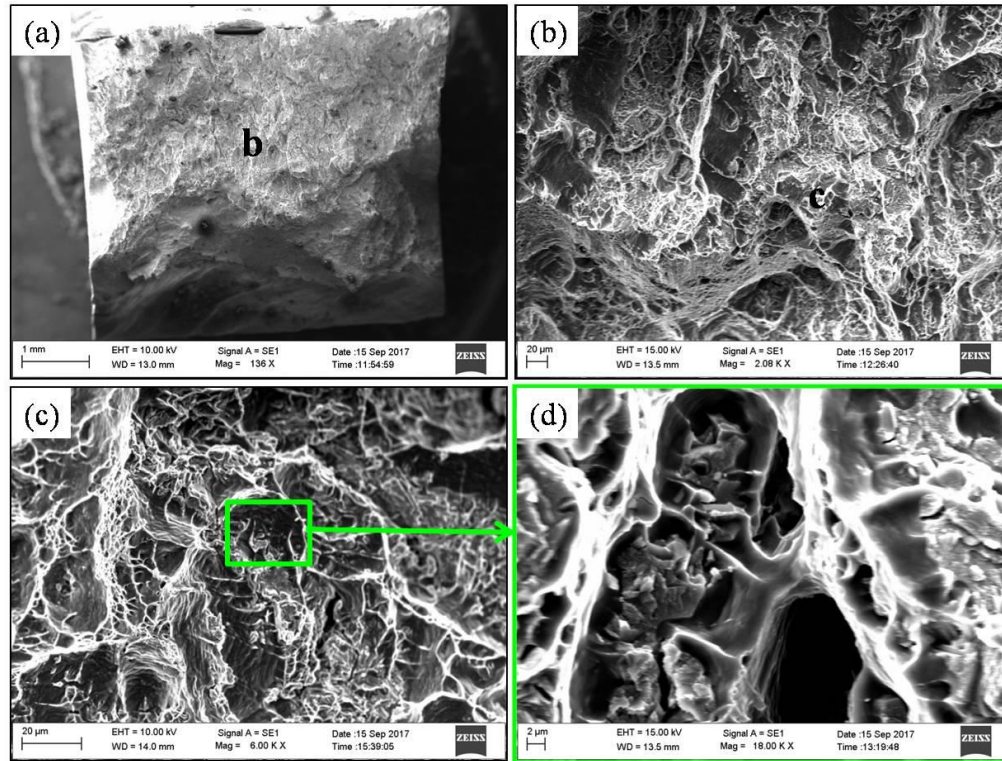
SEM images of fractured surface of tensile test specimen of EB weld with lowest breaking load (a) whole fracture surface at low magnification (b), (c) and (d) high magnification fractographs of zones as indicated in (a) &(b)
